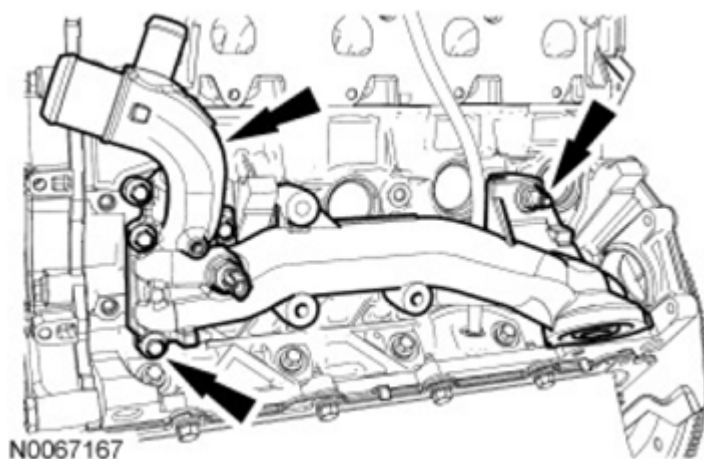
Locating Oil Filter Adapter, Gasket And Nuts
